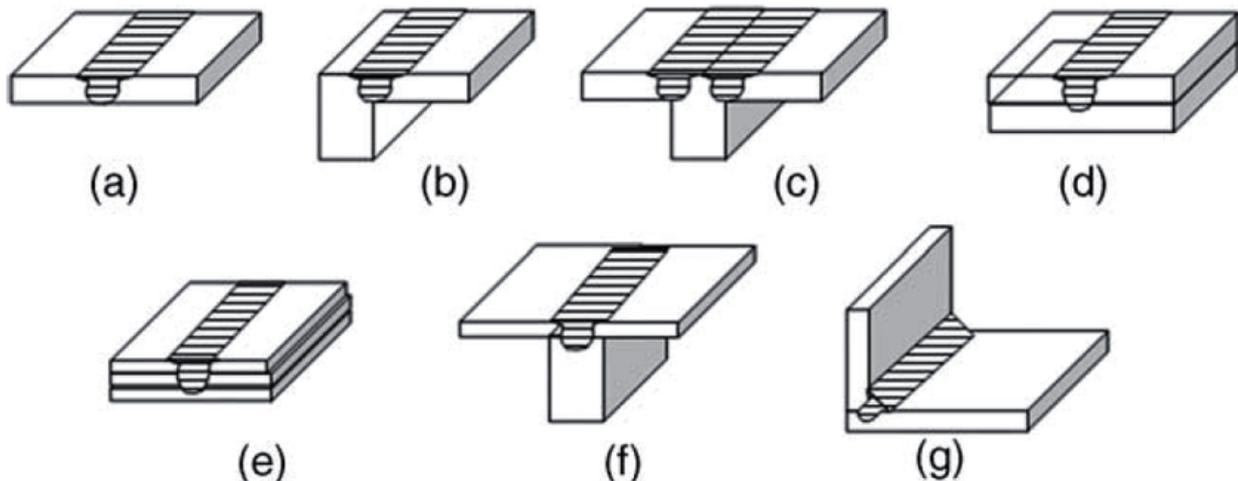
Joint configurations for friction stir welding: (a) square butt, (b) edge butt, (c) T butt joint, (d) lap joint, (e) multiple lap joints, (f) T lap joint, and (g) fillet joint
